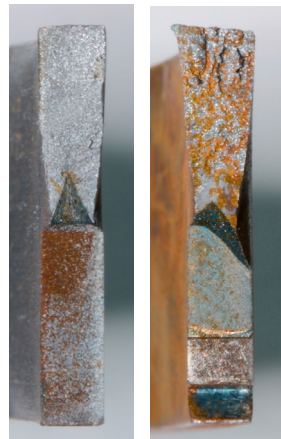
Fracture surfaces of a notched (a) and pre-cracked (b) ring-shaped specimen.
